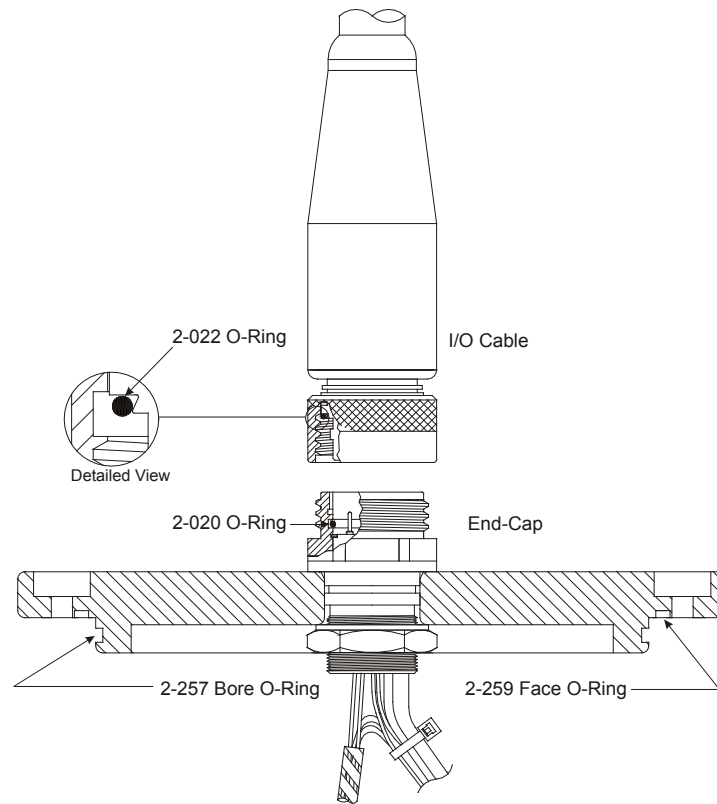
Check for O-Ring Installation on Cable and End-Cap
